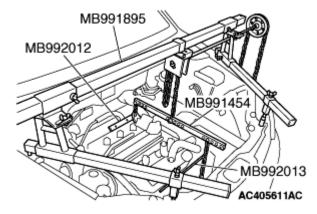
Supporting Engine Using Special Tool MB991895 Courtesy of MITSUBISHI MOTOR SALES OF AMERICA.
